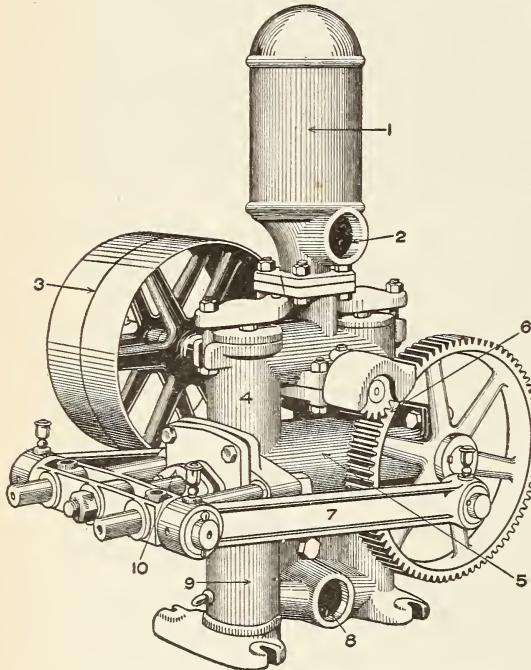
Typical simplex, double-acting displacement pump. 1, Air chamber; 2, discharge opening; 3, tight and loose pulleys; 4, valve chamber; 5, cylinder; 6, gear; 7, connecting rod; 8, suction opening; 9, base; 10, packing gland.
